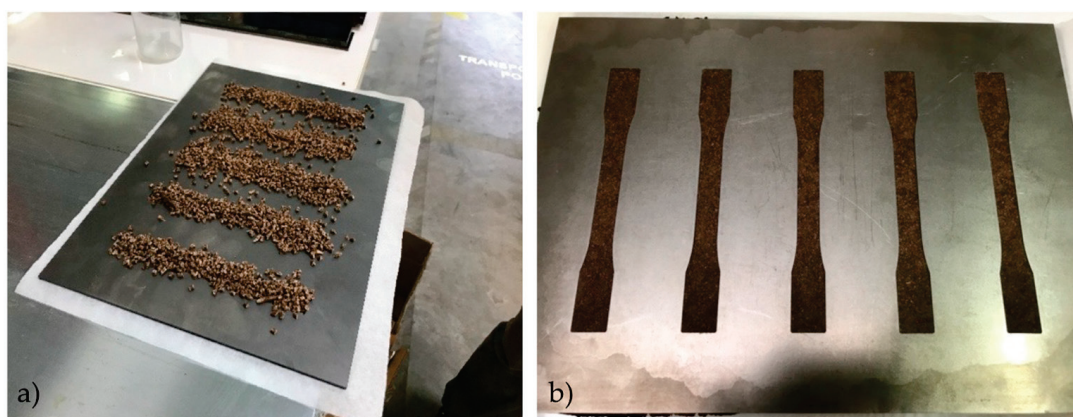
Manufacture of tensile specimens before (a) and after (b) the pressing process in a steel mold plate.
